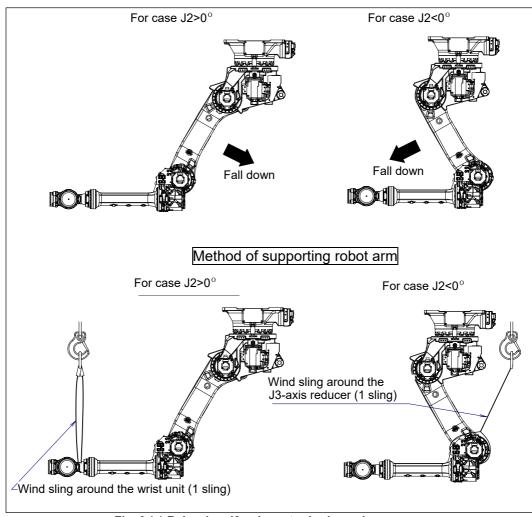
(c) Releasing J2-axis motor brake and measures (R-2000*i*C/220U/190S upside-down mounting)
